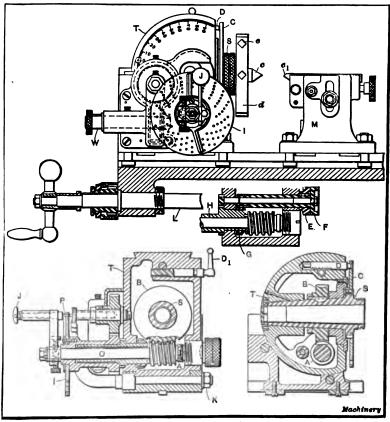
Spiral Head used for Spiral Milling and Indexing
